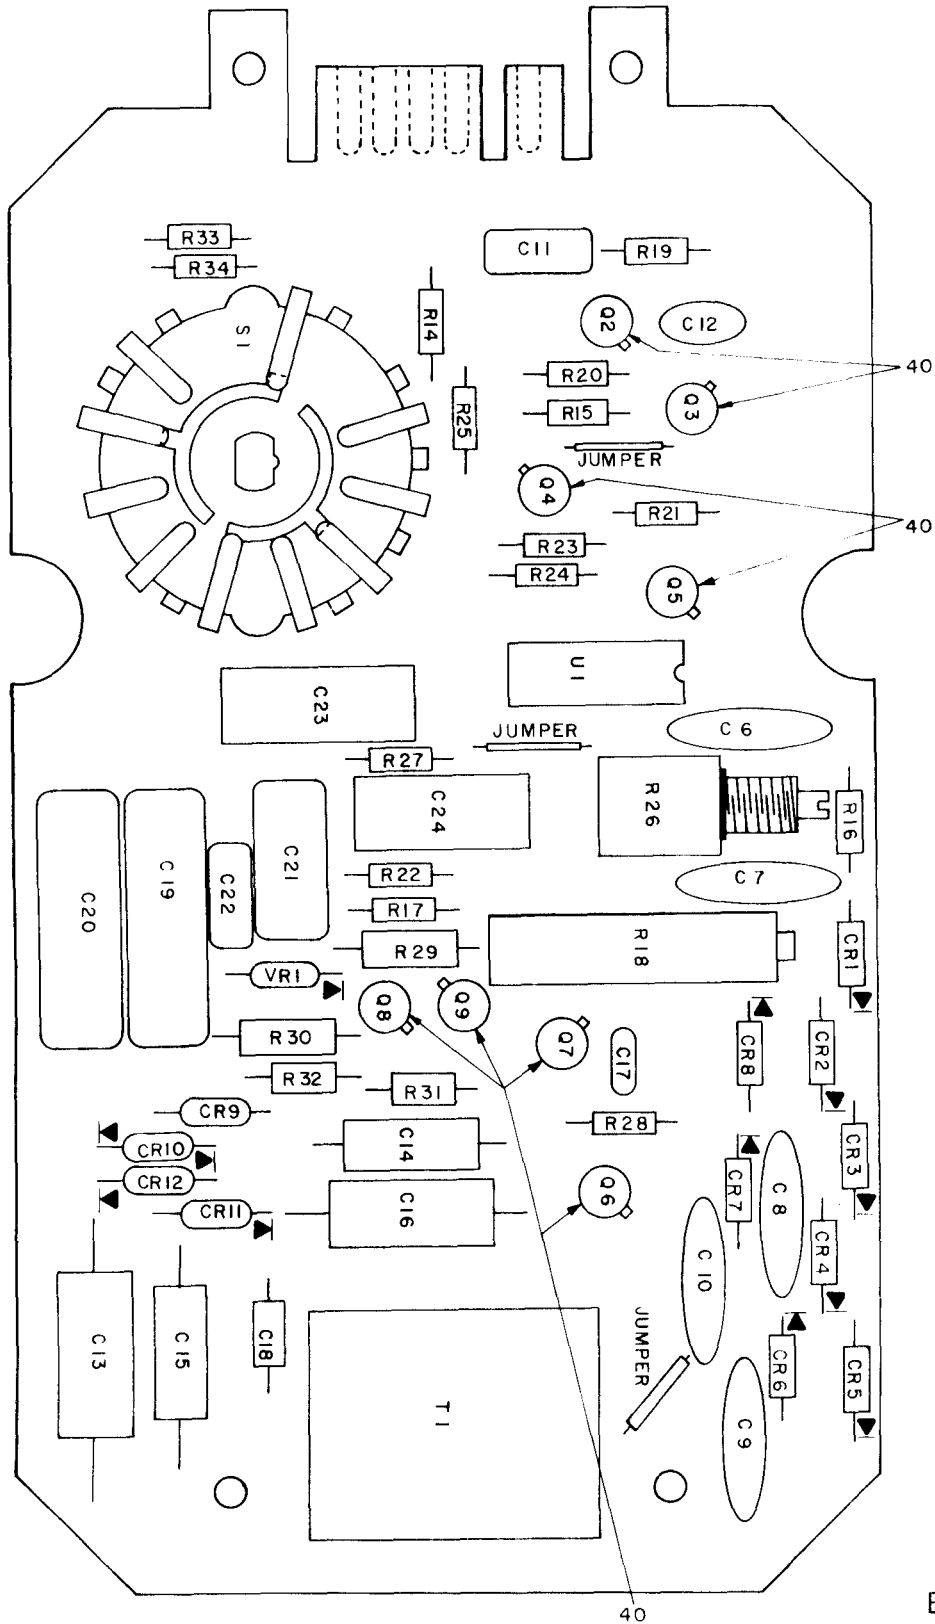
Printed Circuit Board Assembly (Sheet 1 of 2).
